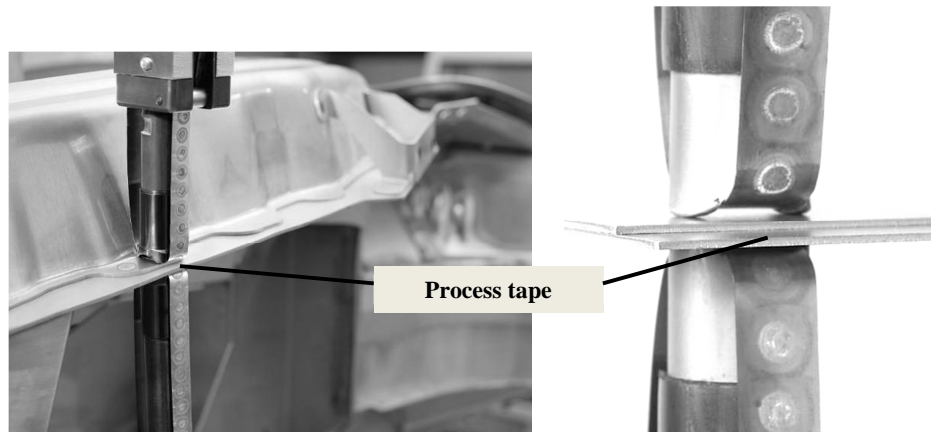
Process tape of DeltaSpot welding, elaborated based on [9]
